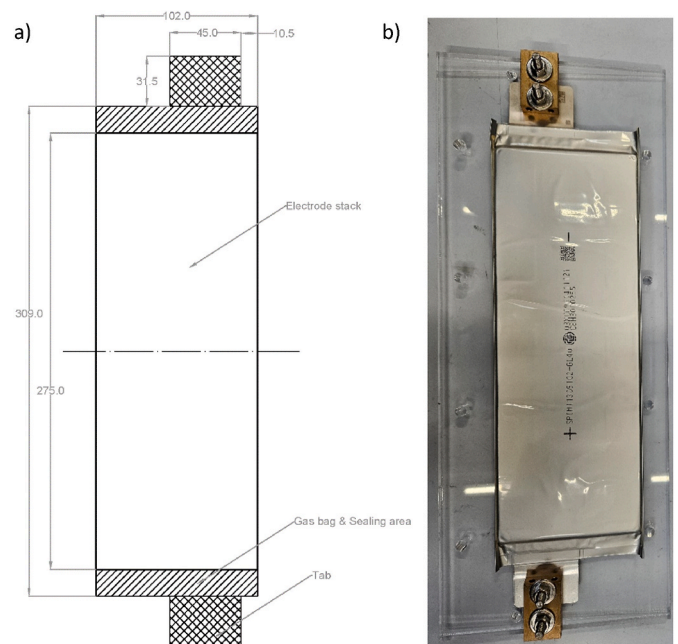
Tested pouch cell a) dimensions and b) mounted in the test jig.
